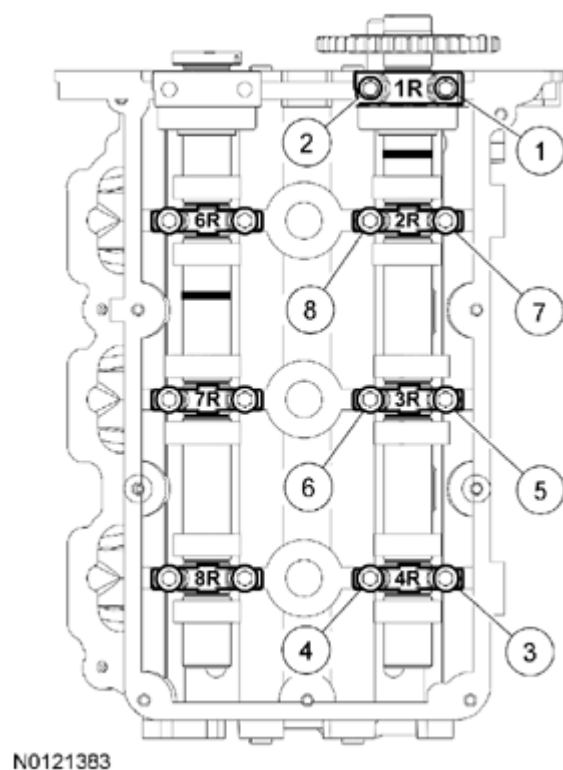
Identifying Camshaft Bearing Cap Bolts Loosening Sequence
